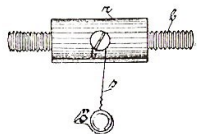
Attachment of the brushes (for condenser machines with fixed casing only).
